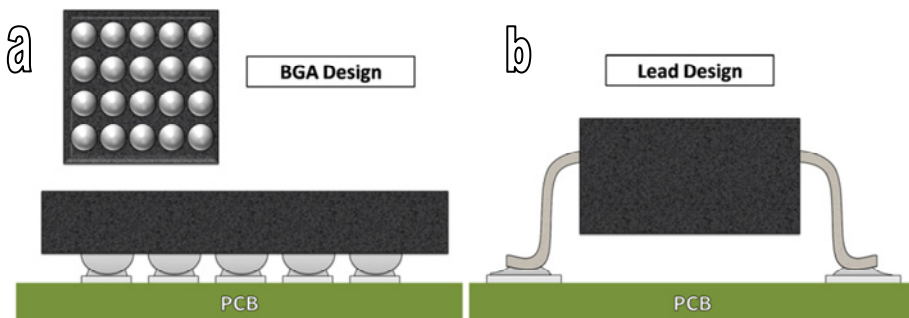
Examples of SMT designs, a) BGA design (bottom and side view of the component) and b) example of a component design with leads.
